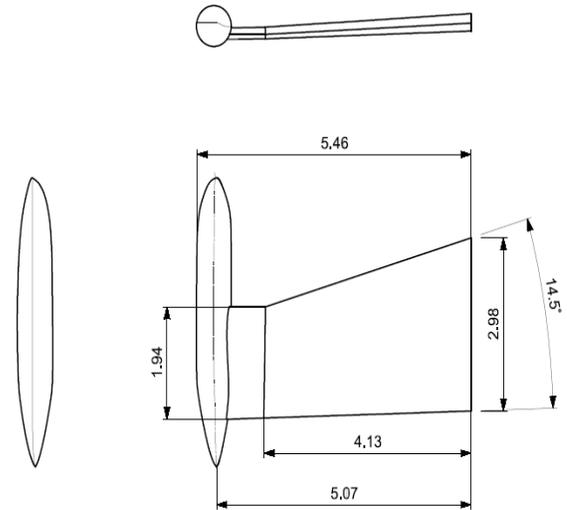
Wing Tip-Tank Drawing (Dimensions in meters)
